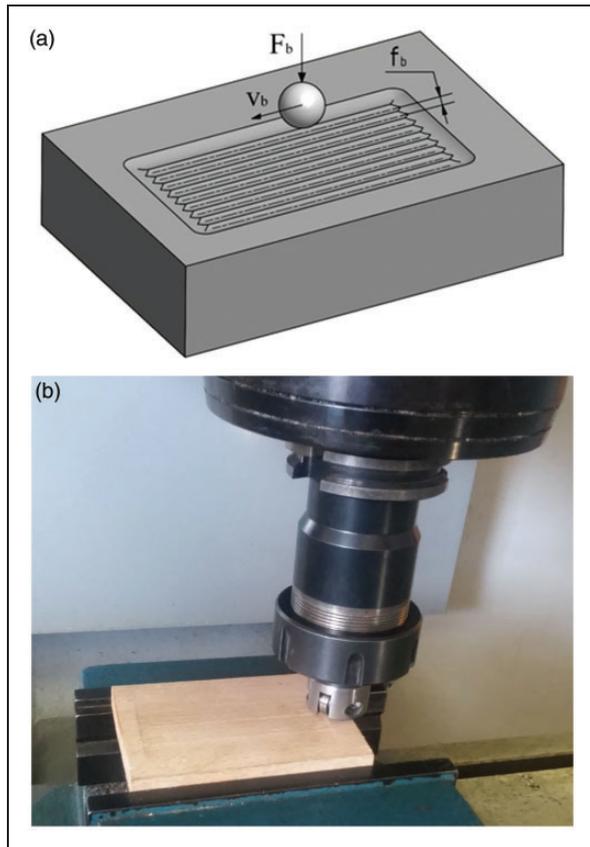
Ball burnishing. (a) schematic view (F_b —ball burnishing force, v_b —ball burnishing speed, f_b —ball burnishing feed rate), (b) photographic view.
